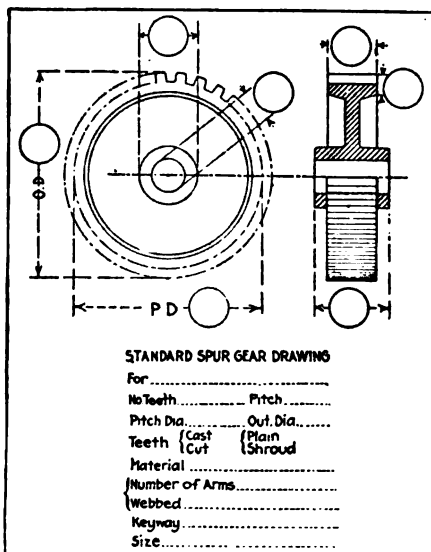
Interchangeable drawings for standard or frequently used parts.
